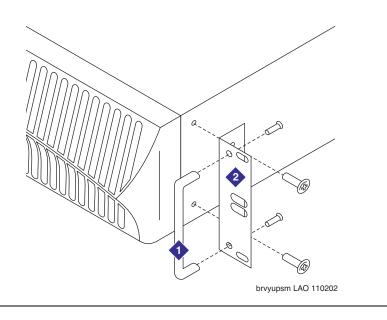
Attaching mounting handles and bracket for a rack-mount UPS
